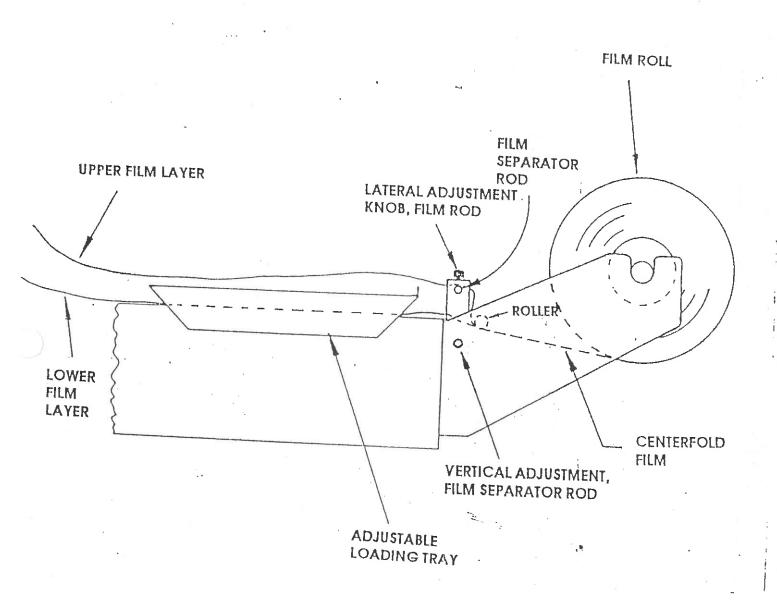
Film Threading Diagram, 6000 L-Sealer Series
